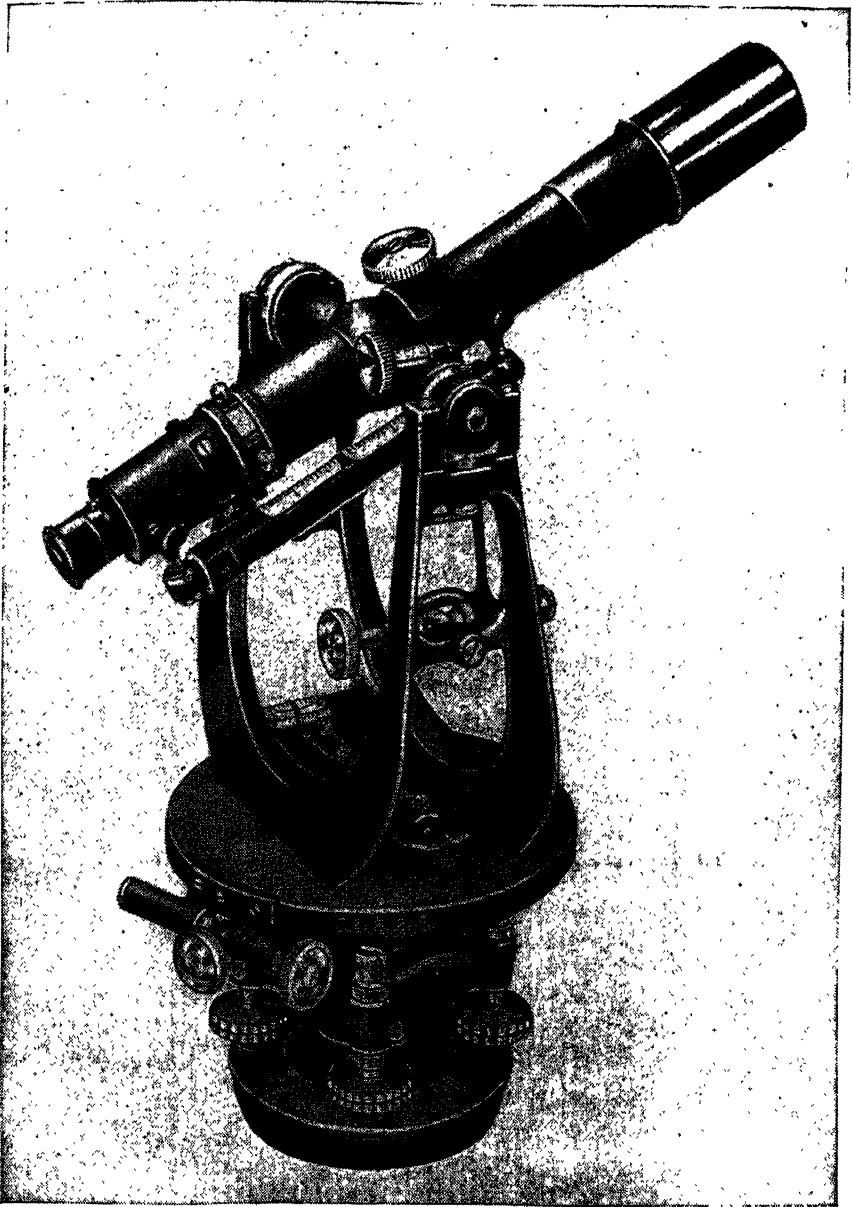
A Berger jig collimator. It has no lower motion, only a single center, no compass, and no verniers. It is especially designed for accurate jig alignment. (C. L. Berger & Sons, Inc.)
